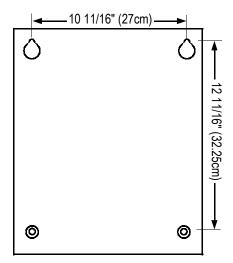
Super Two Cabinet Mounting Hole Dimensions
